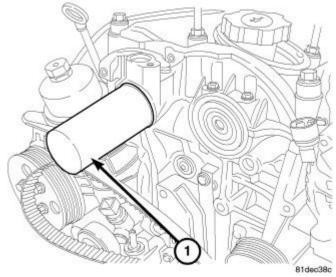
CAMSHAFT OIL SEAL Courtesy of CHRYSLER LLC
